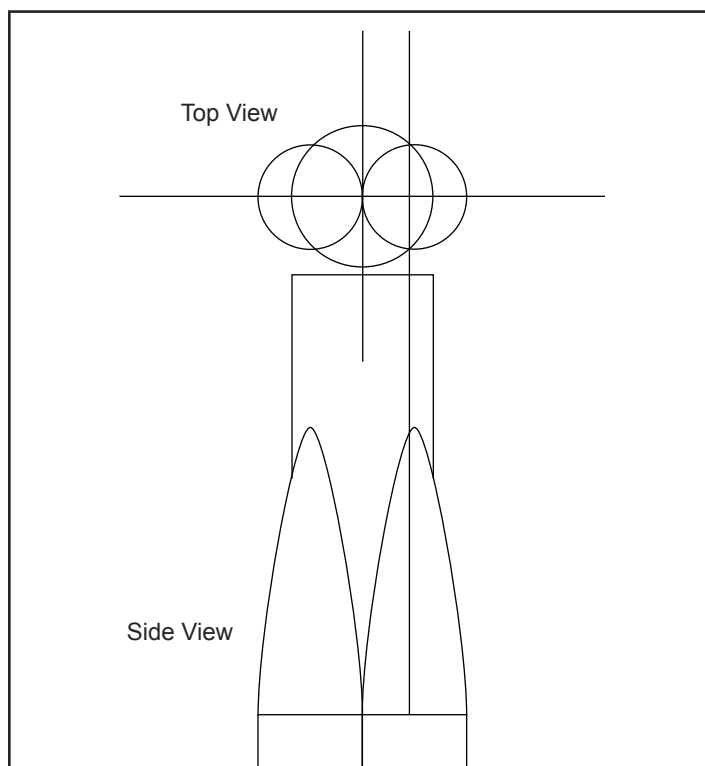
Full-size drawing of the top and side view of the rocket where the cluster joint the single tube.
